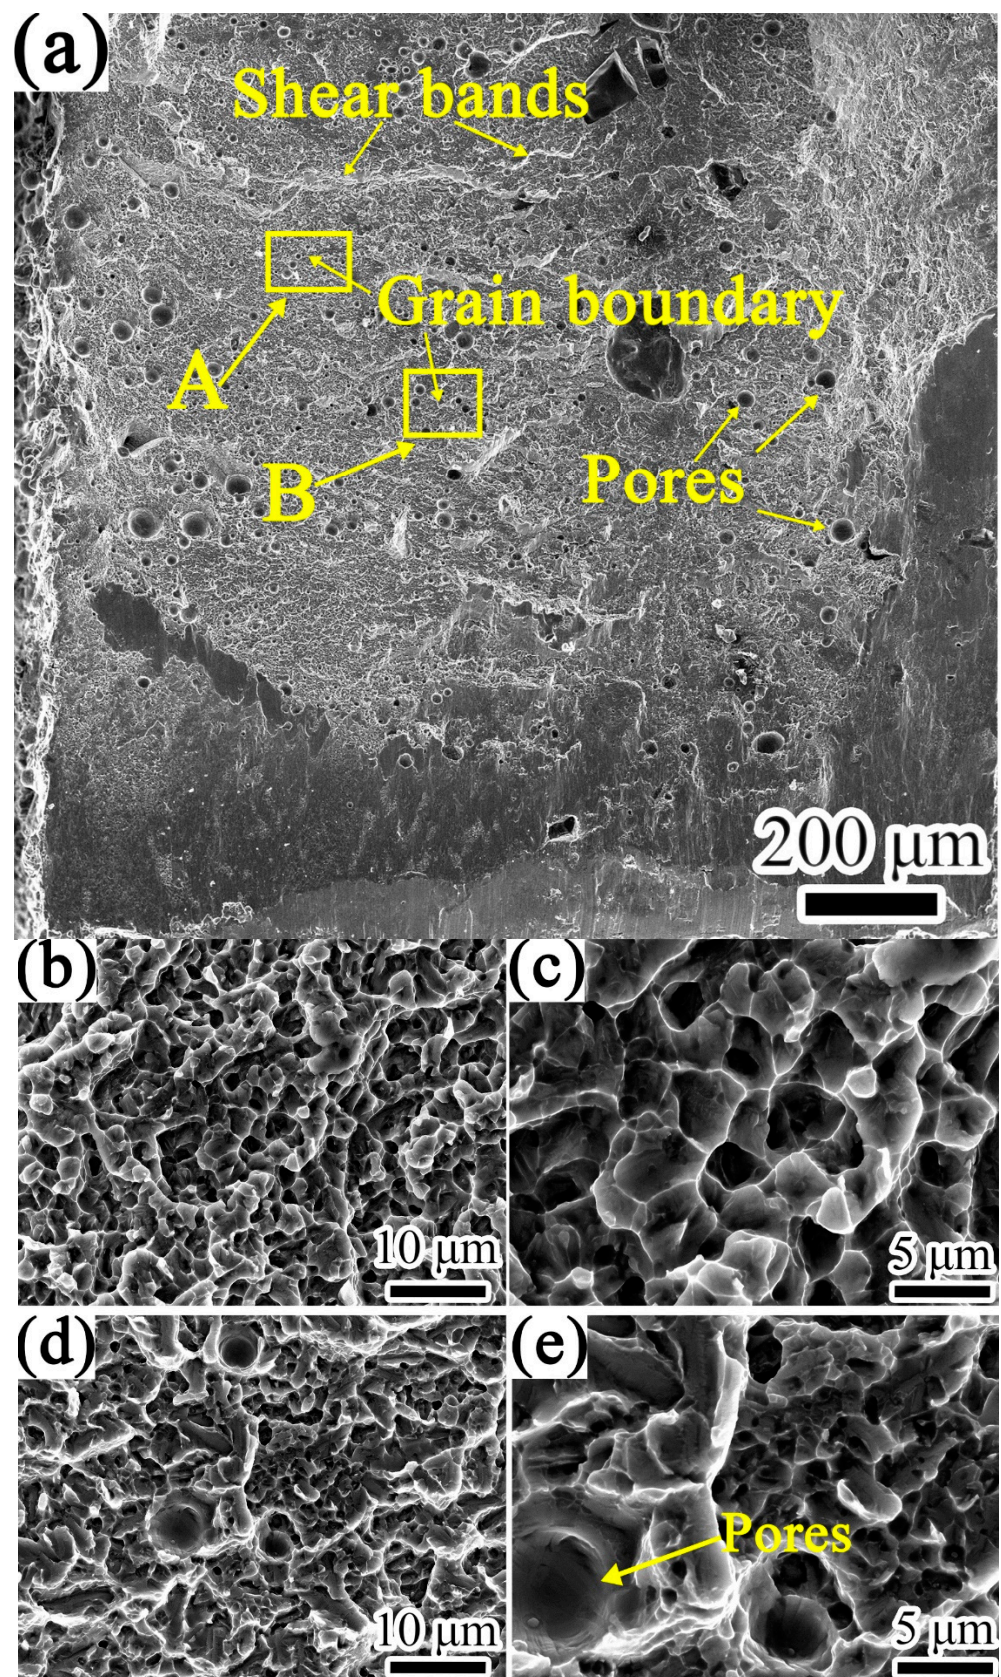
Shear fracture morphology of composite coating: (a) macro fracture; (b,c) enlarged area A in (a); (d,e) enlarged area B in (a).
